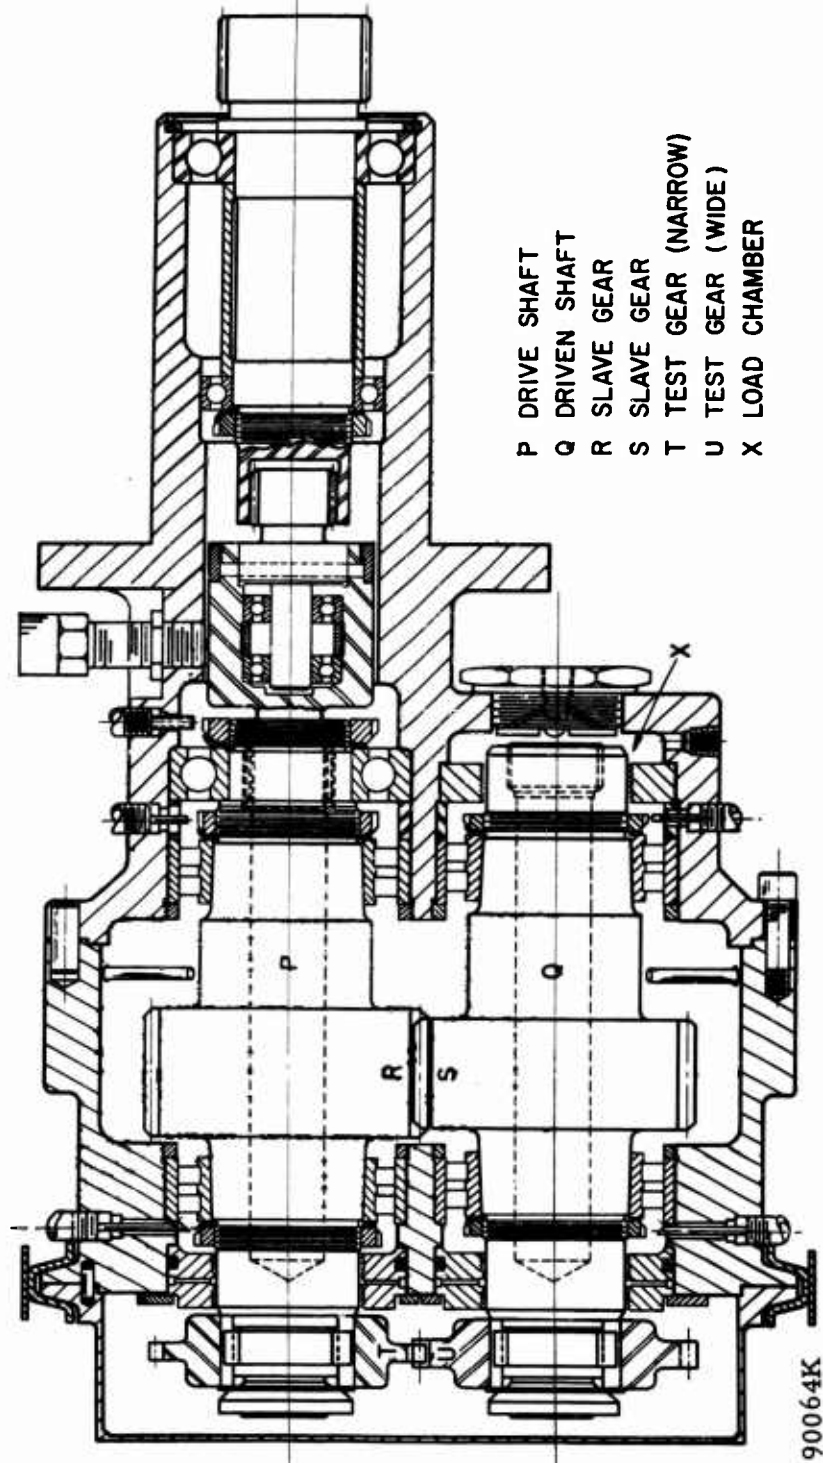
CROSS SECTION OF WADD HIGH-TEMPERATURE GEAR MACHINE
